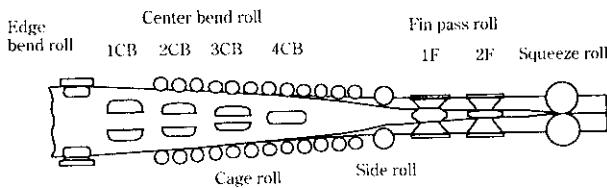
Layout of the CBR forming mill for manufacturing ERW stainless steel pipes
